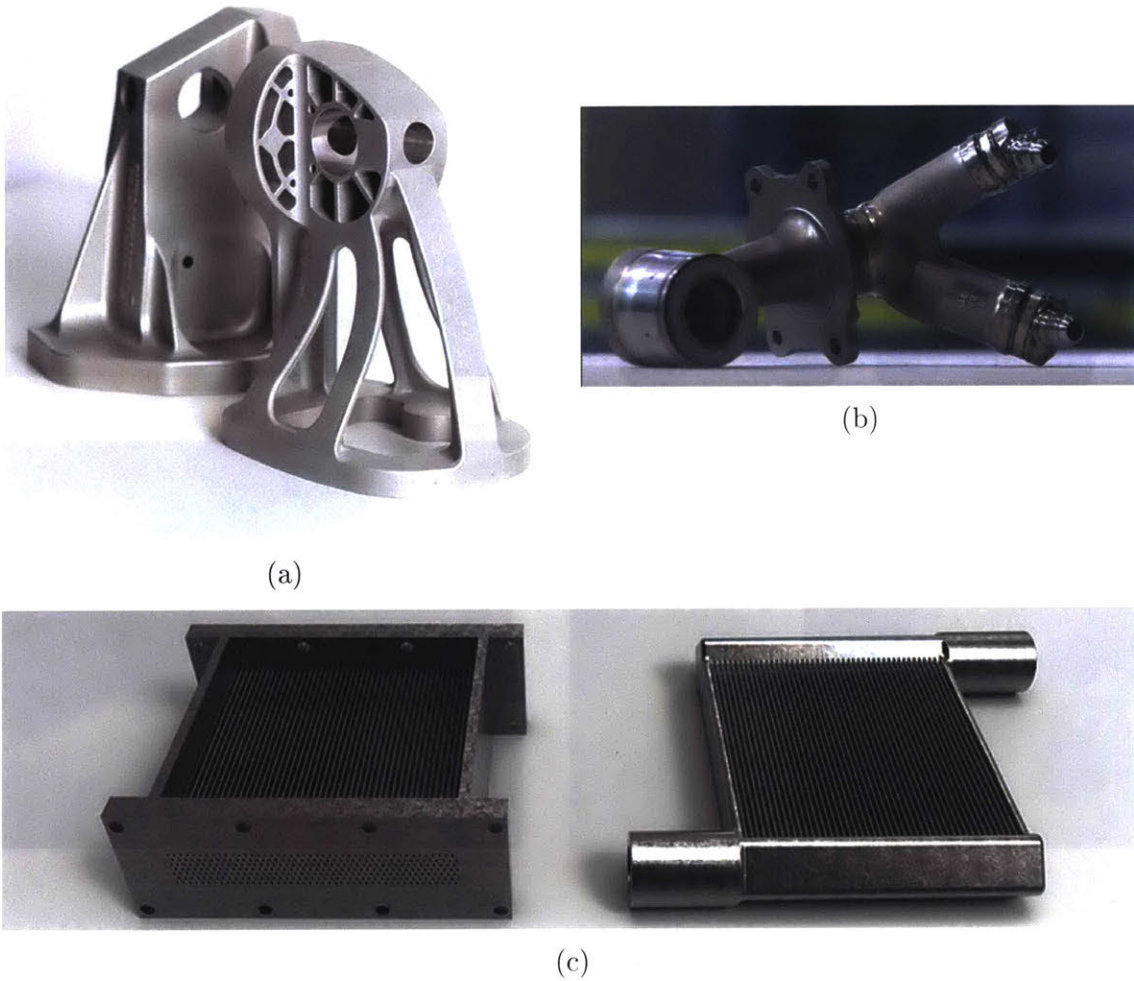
Examples of direct additively manufactured parts including (a) an aircraft bracket (front) that achieves a 7% weight reduction over its traditionally manufacture counterpart (back), (b) an integral fuel nozzle assembly for a jet engine that eliminated 17 parts, and (c) an optimized heat exchanger (right) with 20% better performance than its traditional counterpart (left) [13][27][25].
